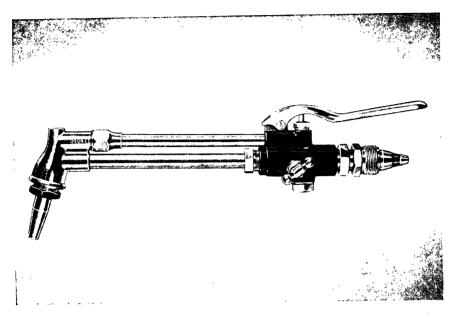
A. A cutting attachment for a combination welding and cutting torch
